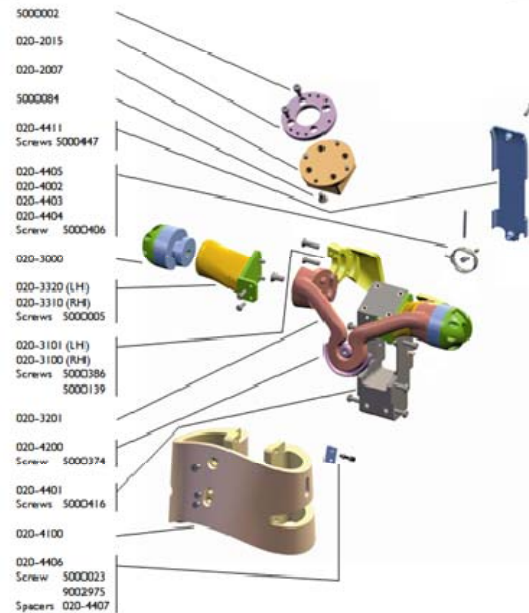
Q3 Thorax Assembly (Part of torso assembly 020-4400)
